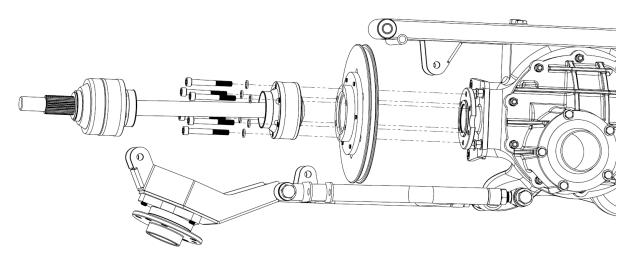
Assemble the CV shafts using the M10 bolts and lock washers (Some parts removed for clarity)
